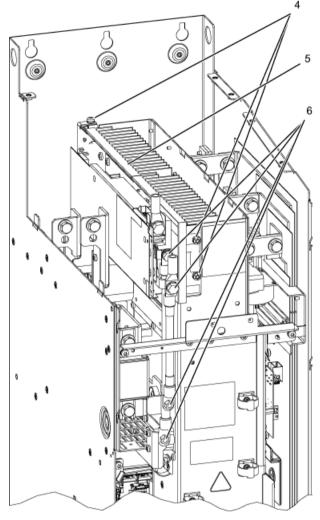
Installing the Braking Module in a Smart Line Module / Active Line Module / Motor Module, frame size GX – steps 4 - 6
